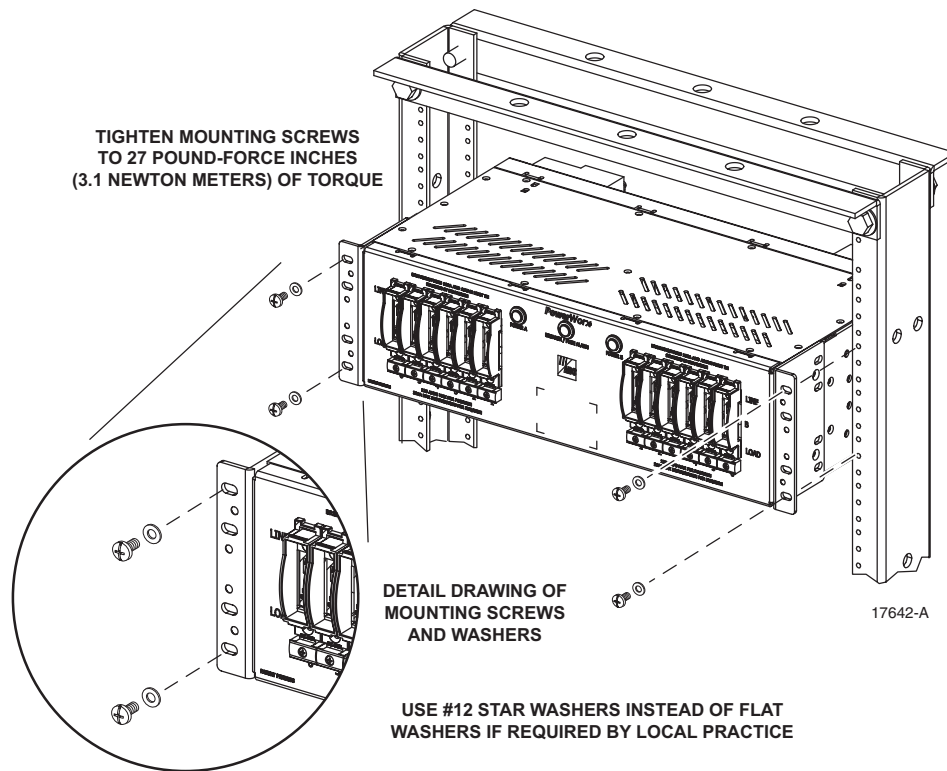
Typical Fuse Panel Installation in Equipment Rack
